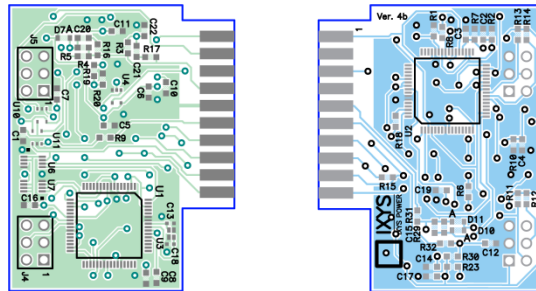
Layout of Digital Control Module (Top and Bottom Layers)
